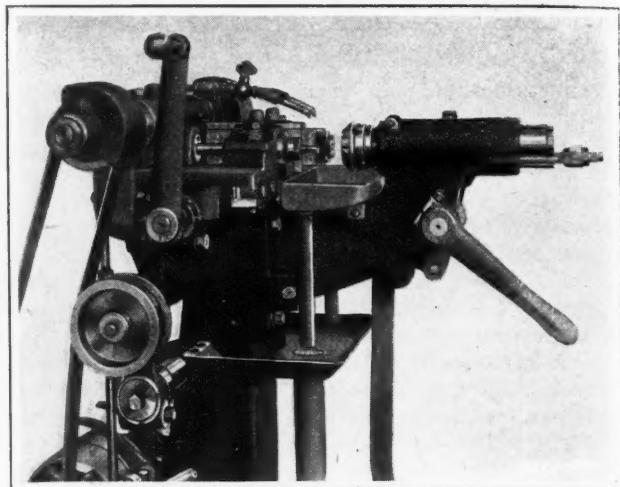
Close View of Mechanism of Langelier Duplex Milling Machine shown in Fig. 1
